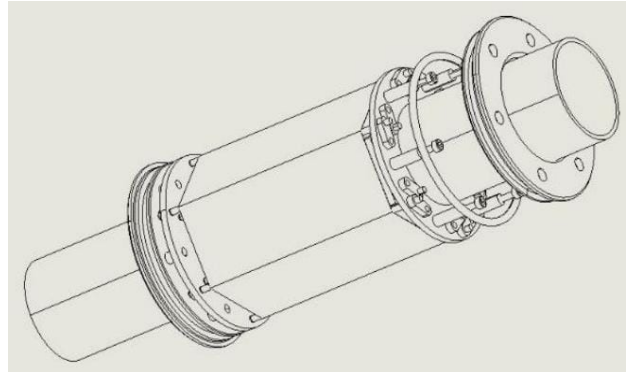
3D assembly drawing of second coaxial CNT speaker prototype. Adapted from [3]
